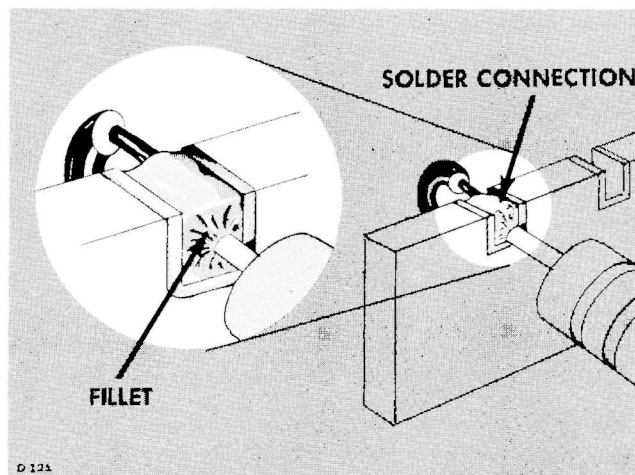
A slight fillet of solder is formed around the wire when heat is applied correctly.
